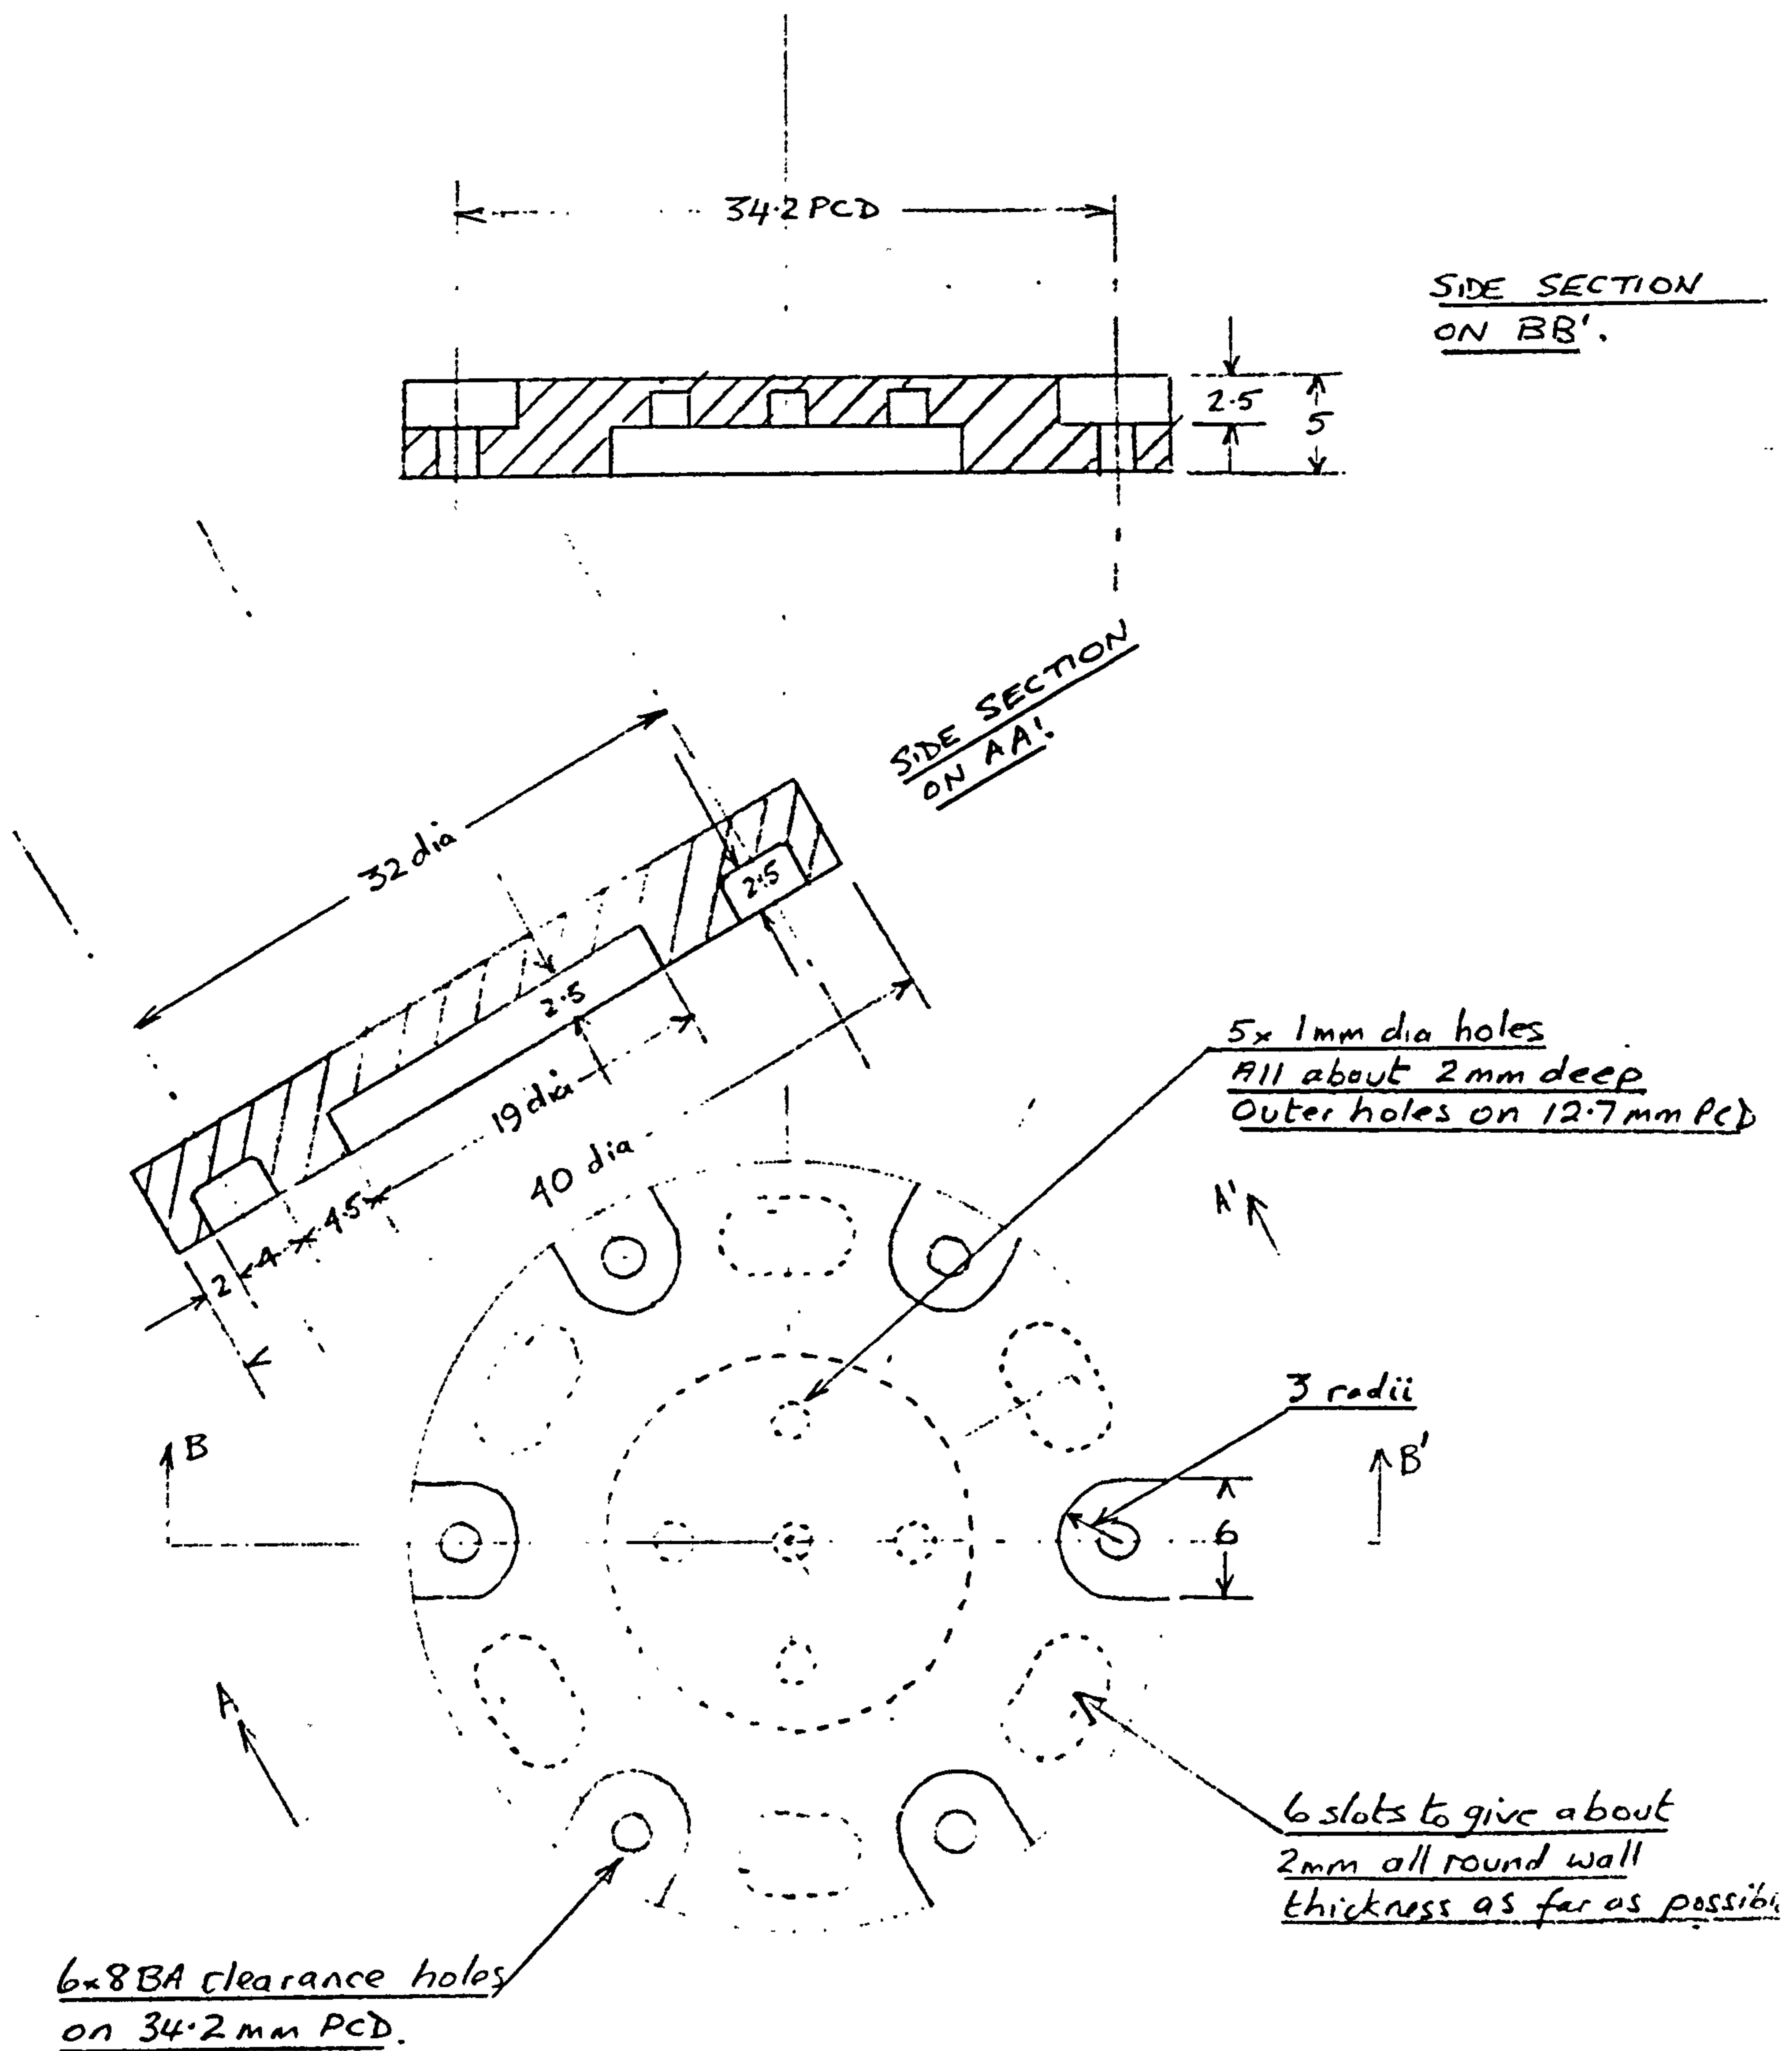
Double size, scale drawing of final injection moulding design for CO sensor top-plate.
